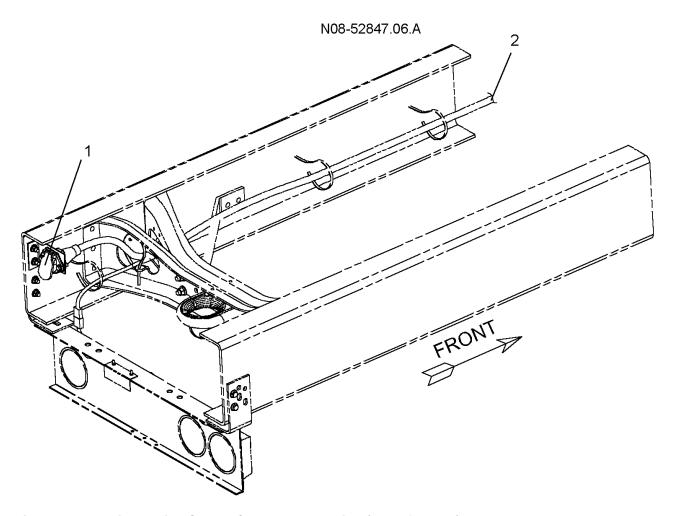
Typical Trailer Socket Connector Location (End of Frame)
